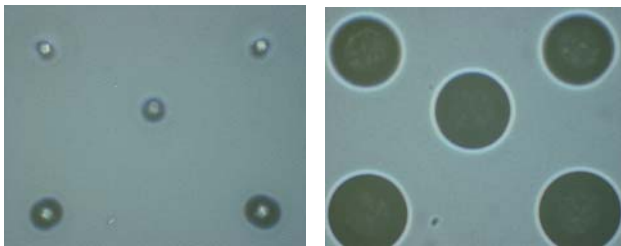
a: Solder ball image visible through focus on surface; b: after moving focus below the surface
